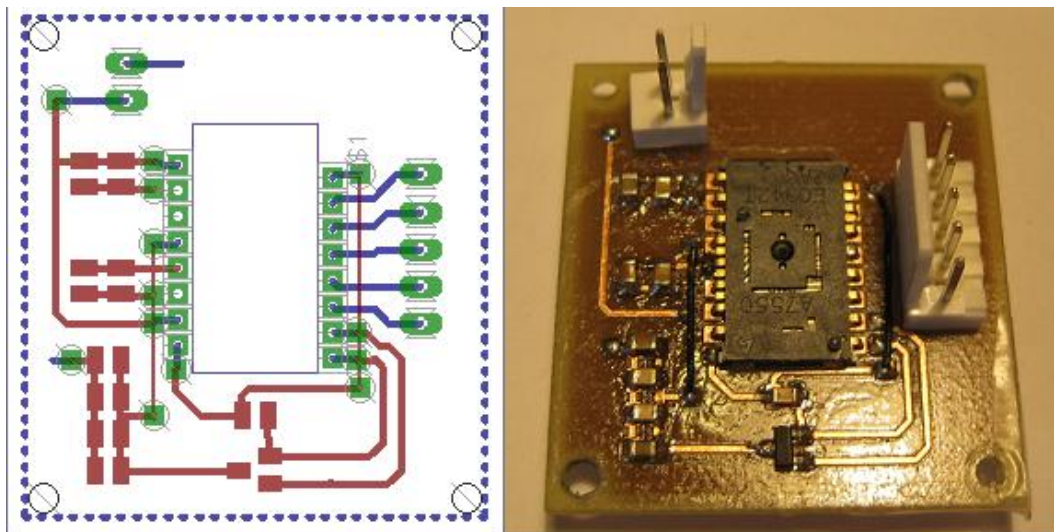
The second schematic, to the left, and the resulting PCB, to the right. SMC and pins for easier attaching SPI cables and power supply are led into the PCB. There are holes in every corner for mounting the PCB to another device easier.
